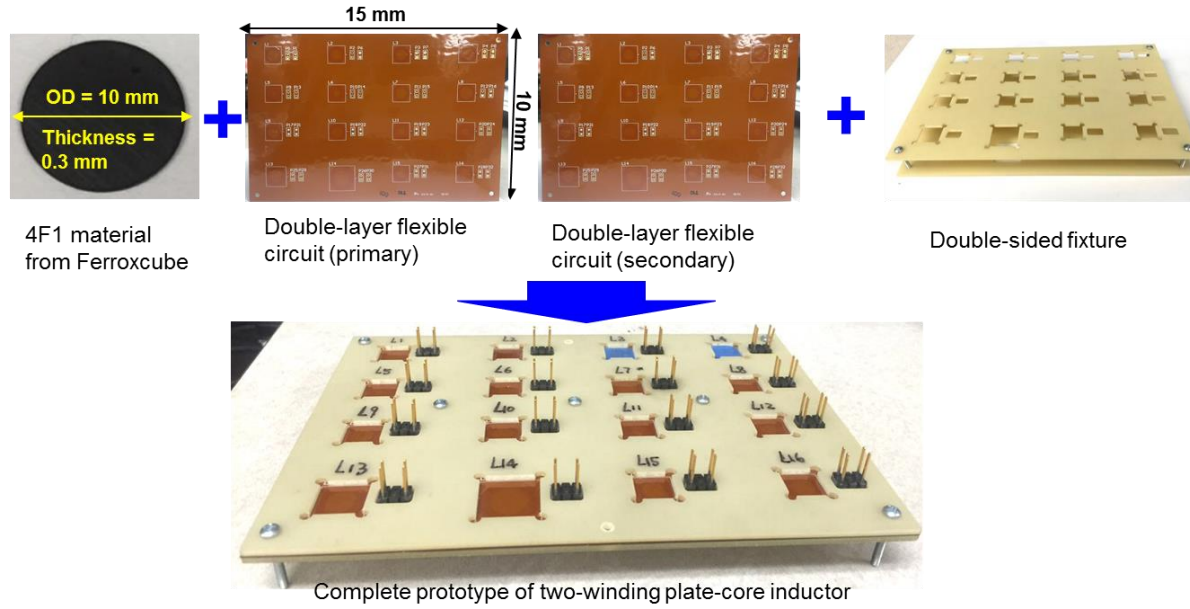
Assembly process of two-winding inductor prototype using two layers of flexible circuits, ferrite core material, and two masks.
